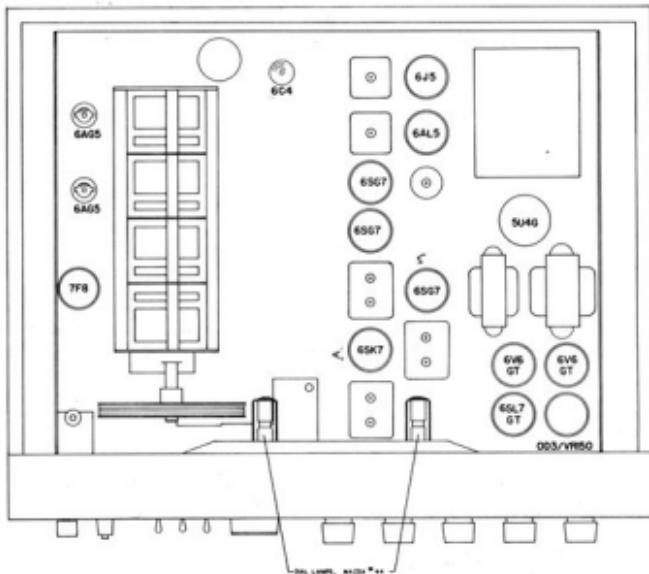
Top View Showing Location of Tubes and Dial Lamps
